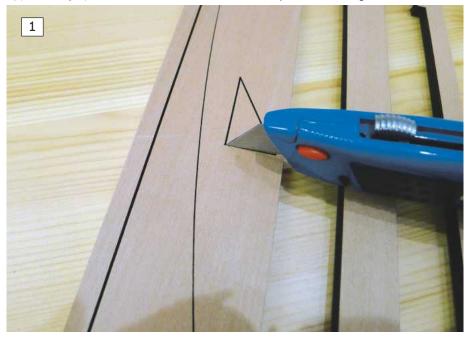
When the parts are dropped out of the plywood sheet, the next job is to dress them on a flat abrasive surface to break-up the glazed finish of their edges so as allow glue to soak in, Photo 2. With the supplied stand however, its test assembly proved to be such a struggle that rather than remove the parts again for cleaning, I decided to leave them together, make sure they were square and finally squeeze them further totally together (gently!) in a vice, safe in the knowledge that they should never come apart again. A varnish application would ensure a permanent bond and the dark edges of the glazed laser cuts contrasted nicely with the light wood surface, Photo 3. So yes, no glue and this goes to show how accurately cut are the stand parts and their slots.
